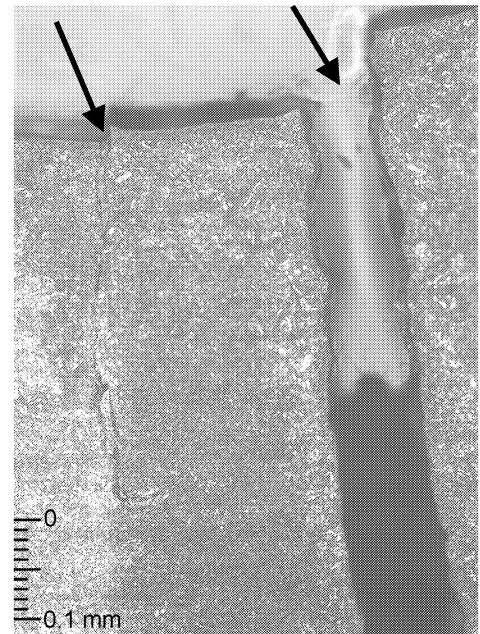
Crack surface mismatch (at arrows) due to relieved residual stresses. Left crack initiated at the thread root, right crack initiated at the pipe inner surface. Crack development followed in Figure 6-16.
